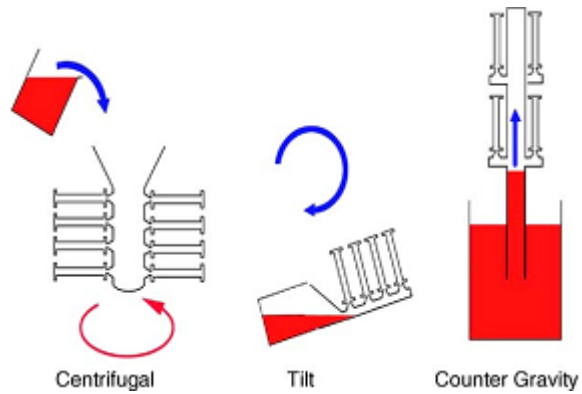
Three investment casting processes under development for the manufacturing of γ -TiAl turbine blades^[13].
